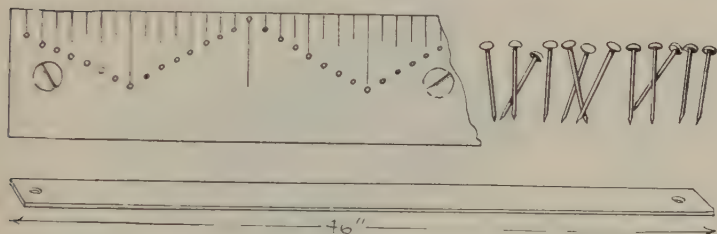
DIAGRAM OF STRAIGHT EDGE AND RULE STRIPS
